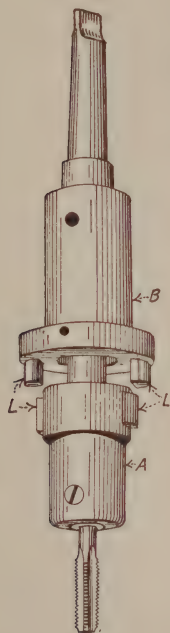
Le-land tapping attachment. (Courtesy of Pratt & Whitney Company.)
